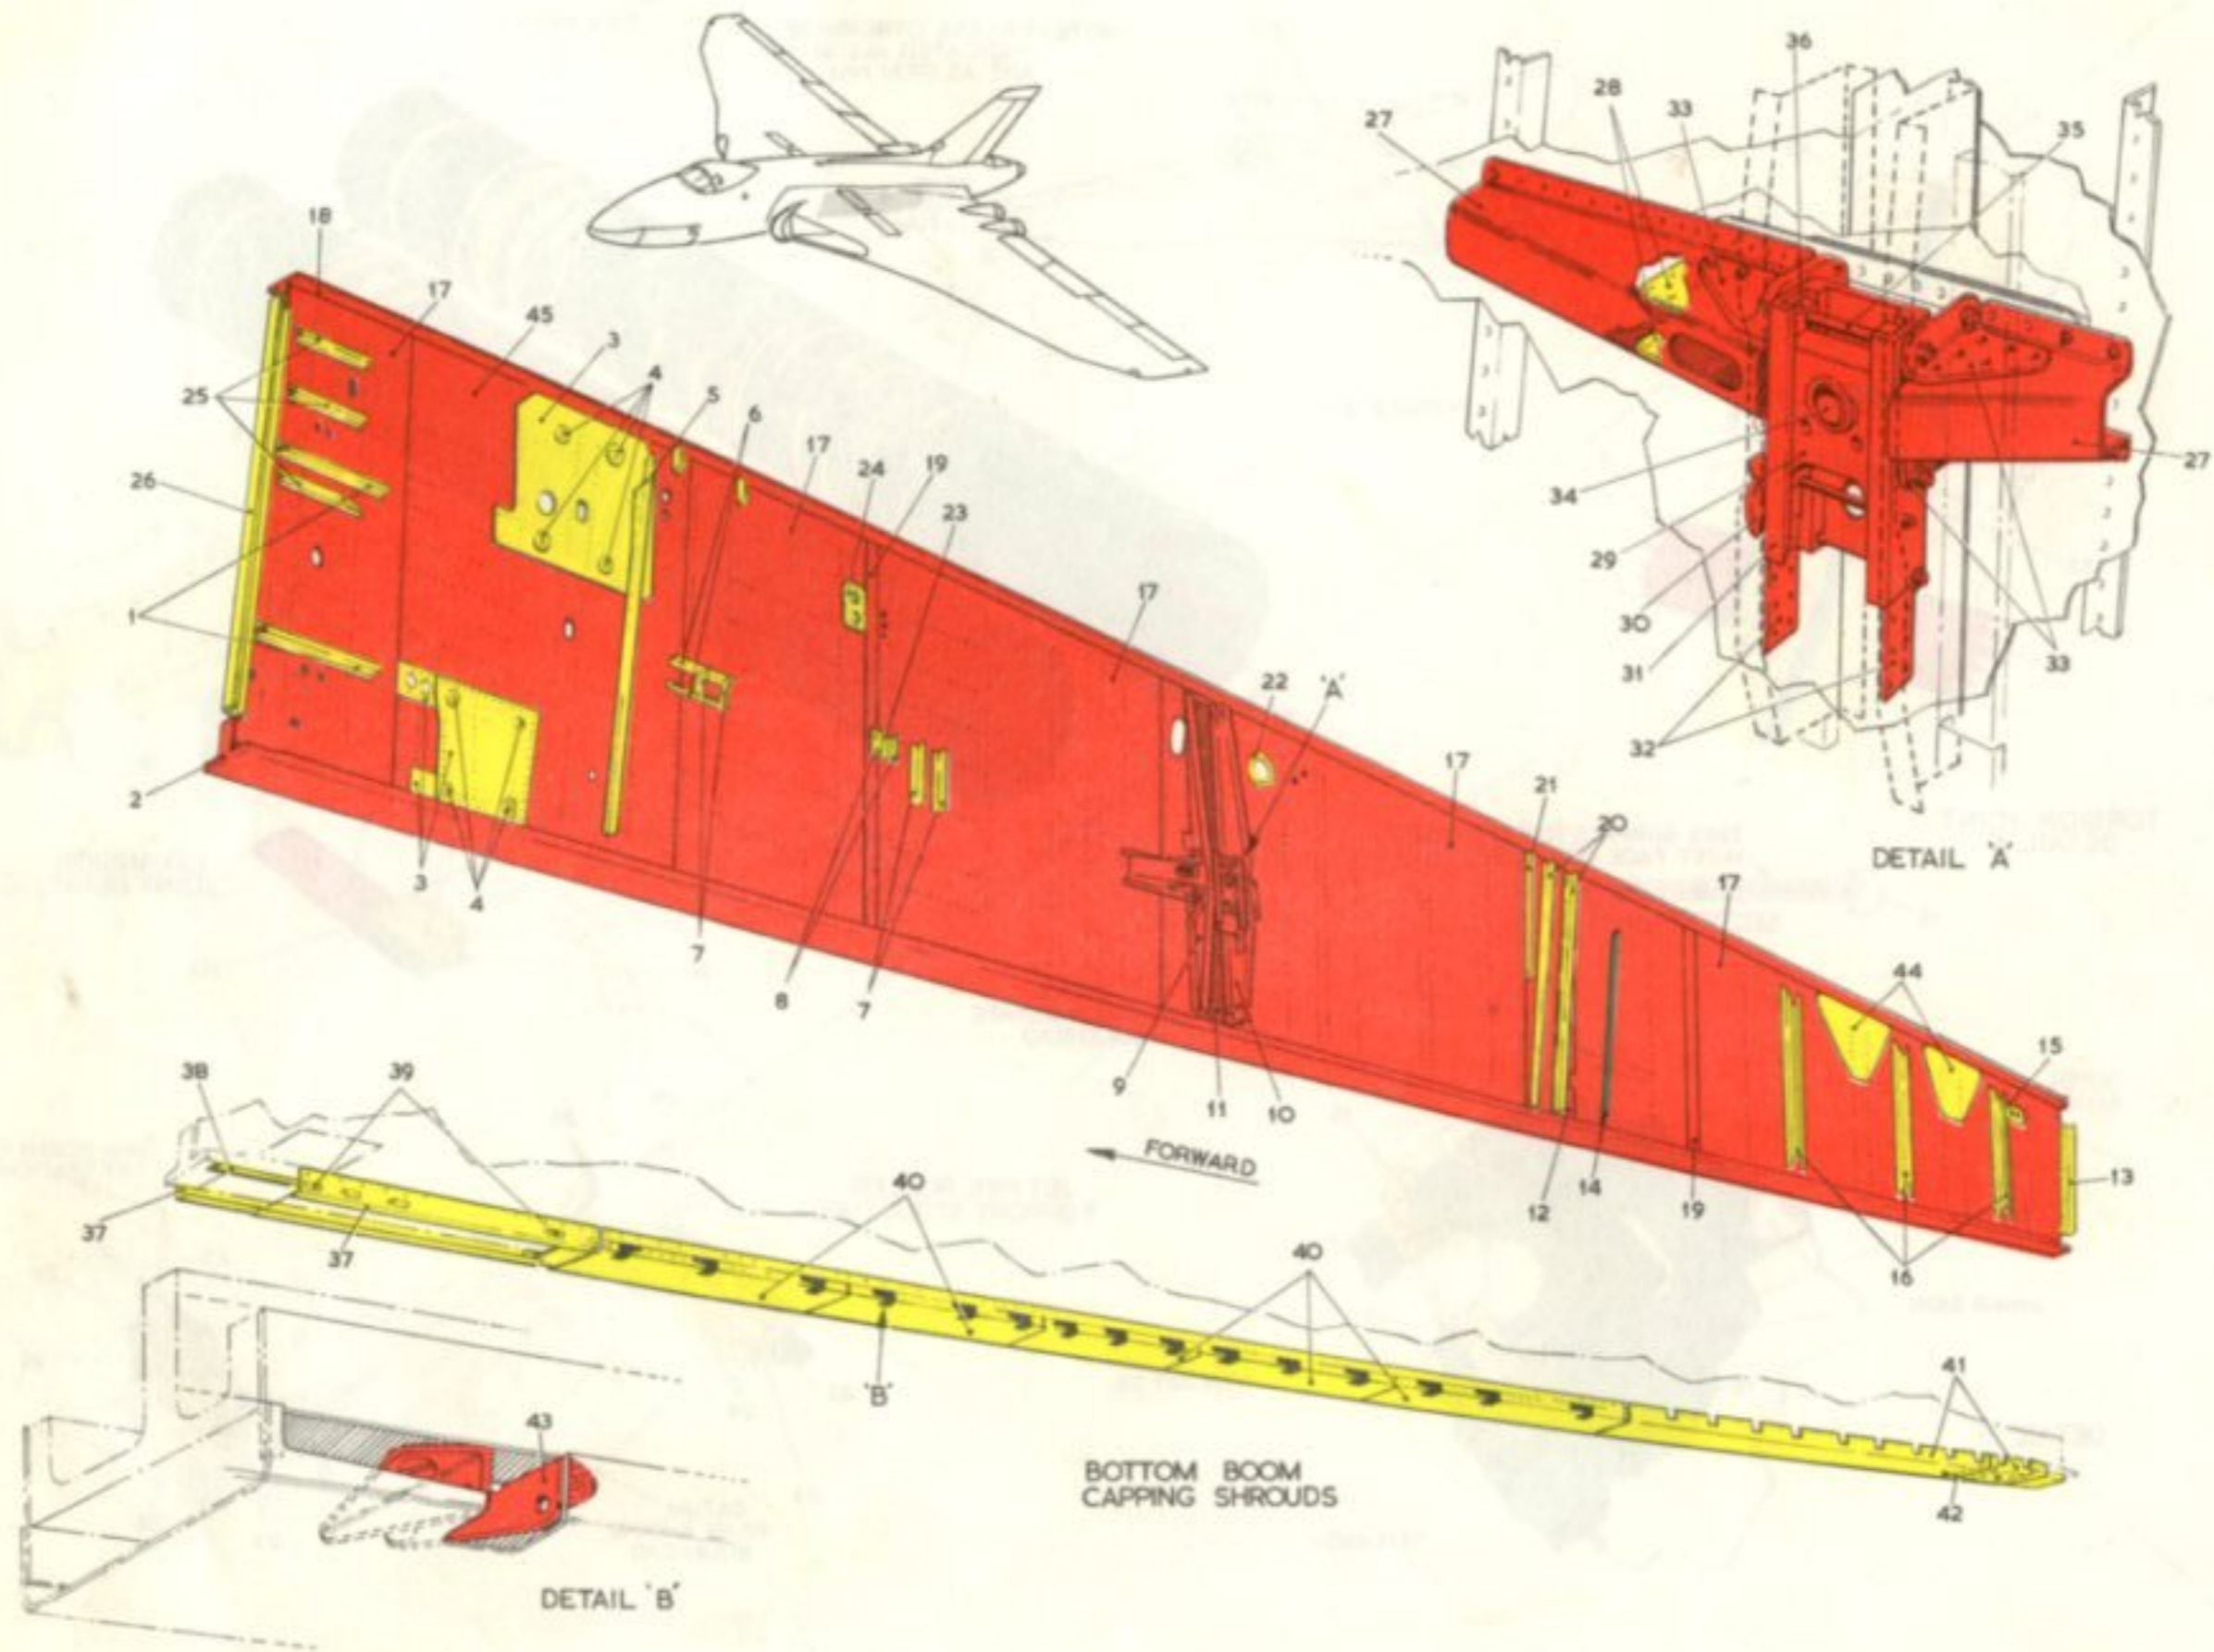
Inboard engine rib - outboard face - port (Post Mod. 729 and 906)
